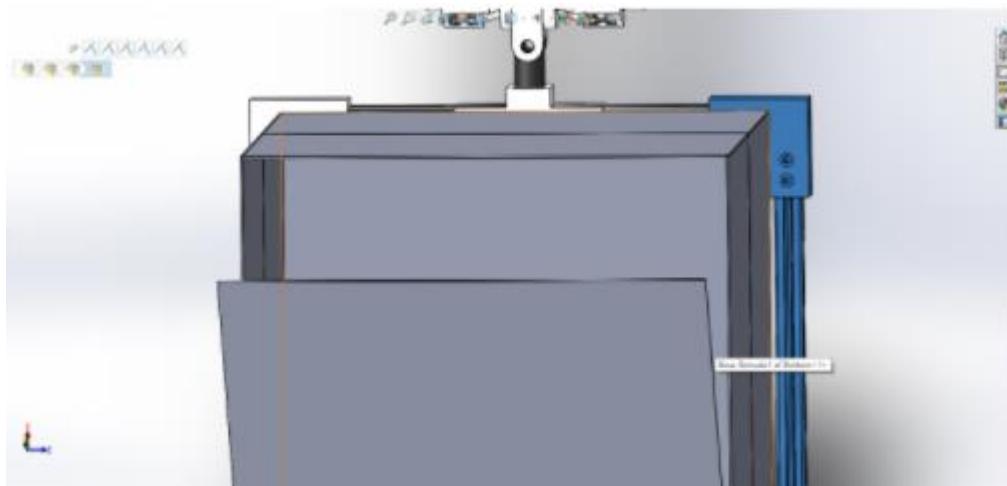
Subassembly #1 (Upper Frame, Upper Right 90D Bracket & Side Piece) (in blue)
